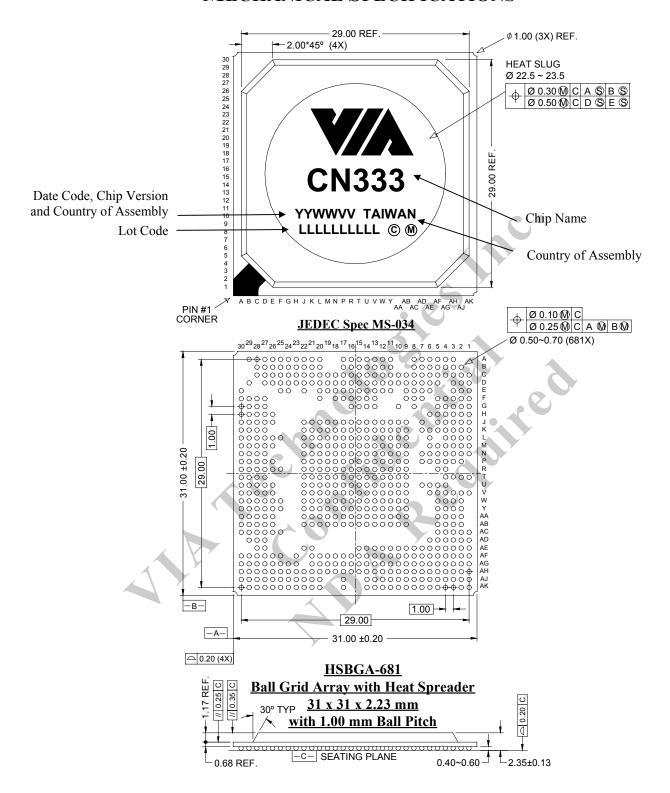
Mechanical Specifications - 681-Pin HSBGA Ball Grid Array Package with Heat Spreader
